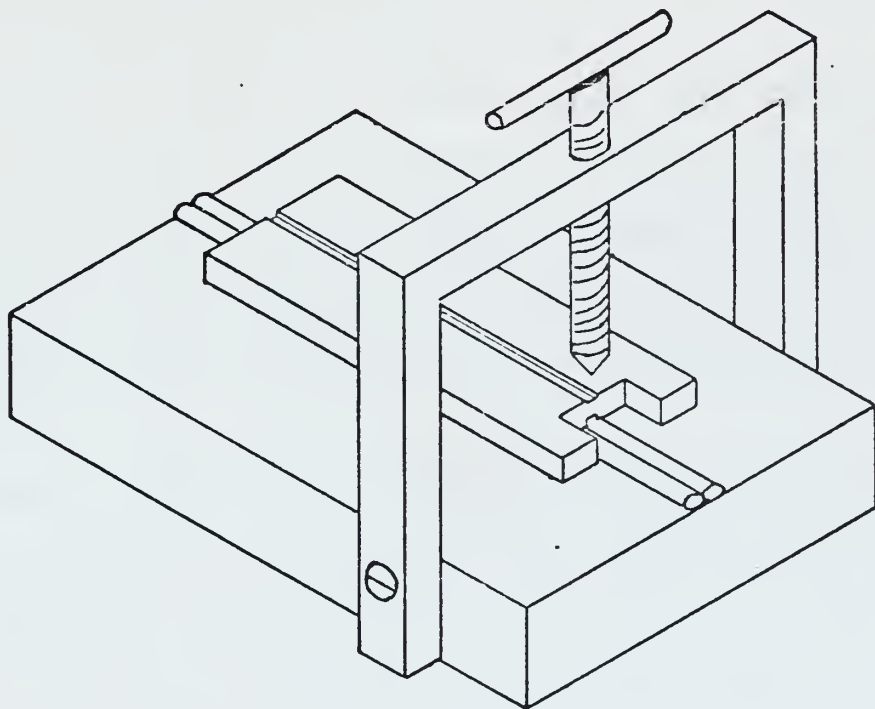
The fabricated specimen is shown in the fixture used to introduce the crack. A point load is applied by the turnbolt at the end of the specimen as shown. The specimen rests on two thin rods acting as fulcrums.
